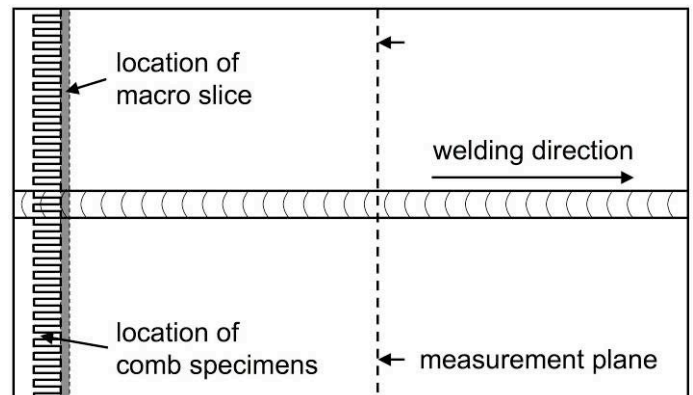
Schematic representation of welded plate showing location of reference combs, slice extracted for macrograph and location of measurement plane.
